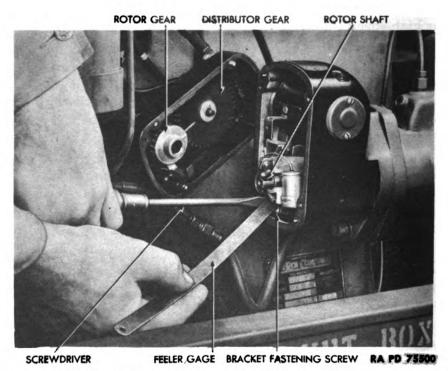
Adjusting Compressor Unit Engine Magneto Contact Points
